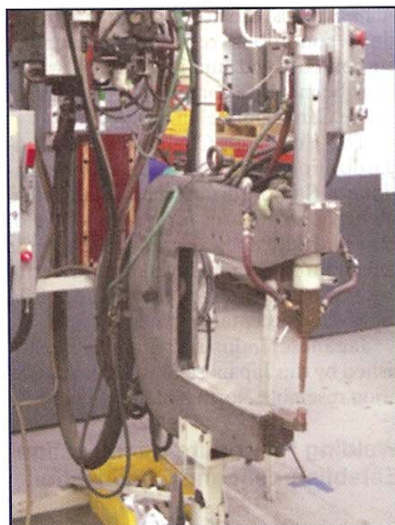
A large C-type gun. Welding guns should have a rigid structure, preferably made of a nonmagnetic material. (Photo courtesy of Bombardier.)
